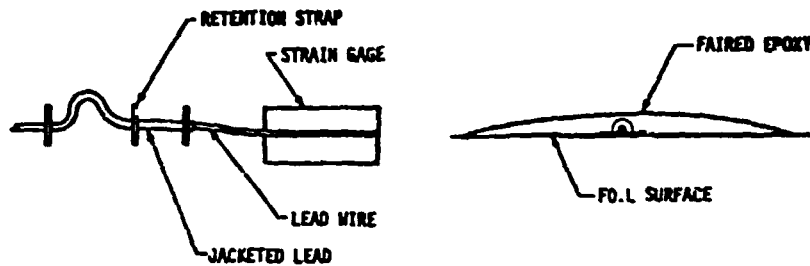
EXTERIOR FOIL STRAIN GAGE INSTALLATION
